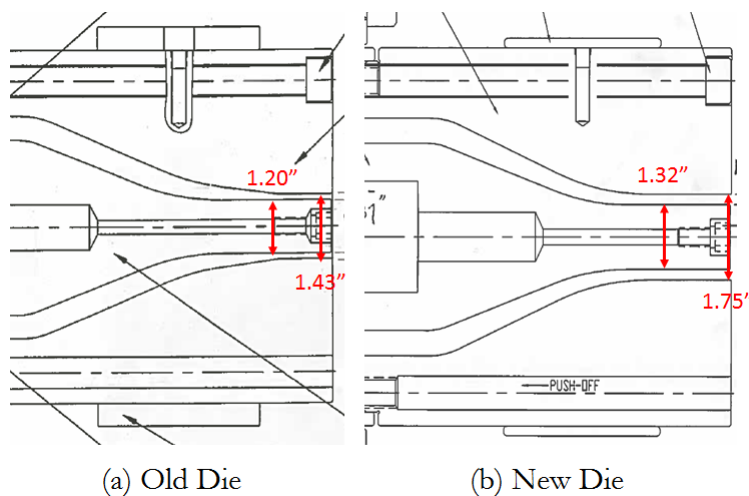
Die drawings for the (a) Old Die and (b) New Die.
